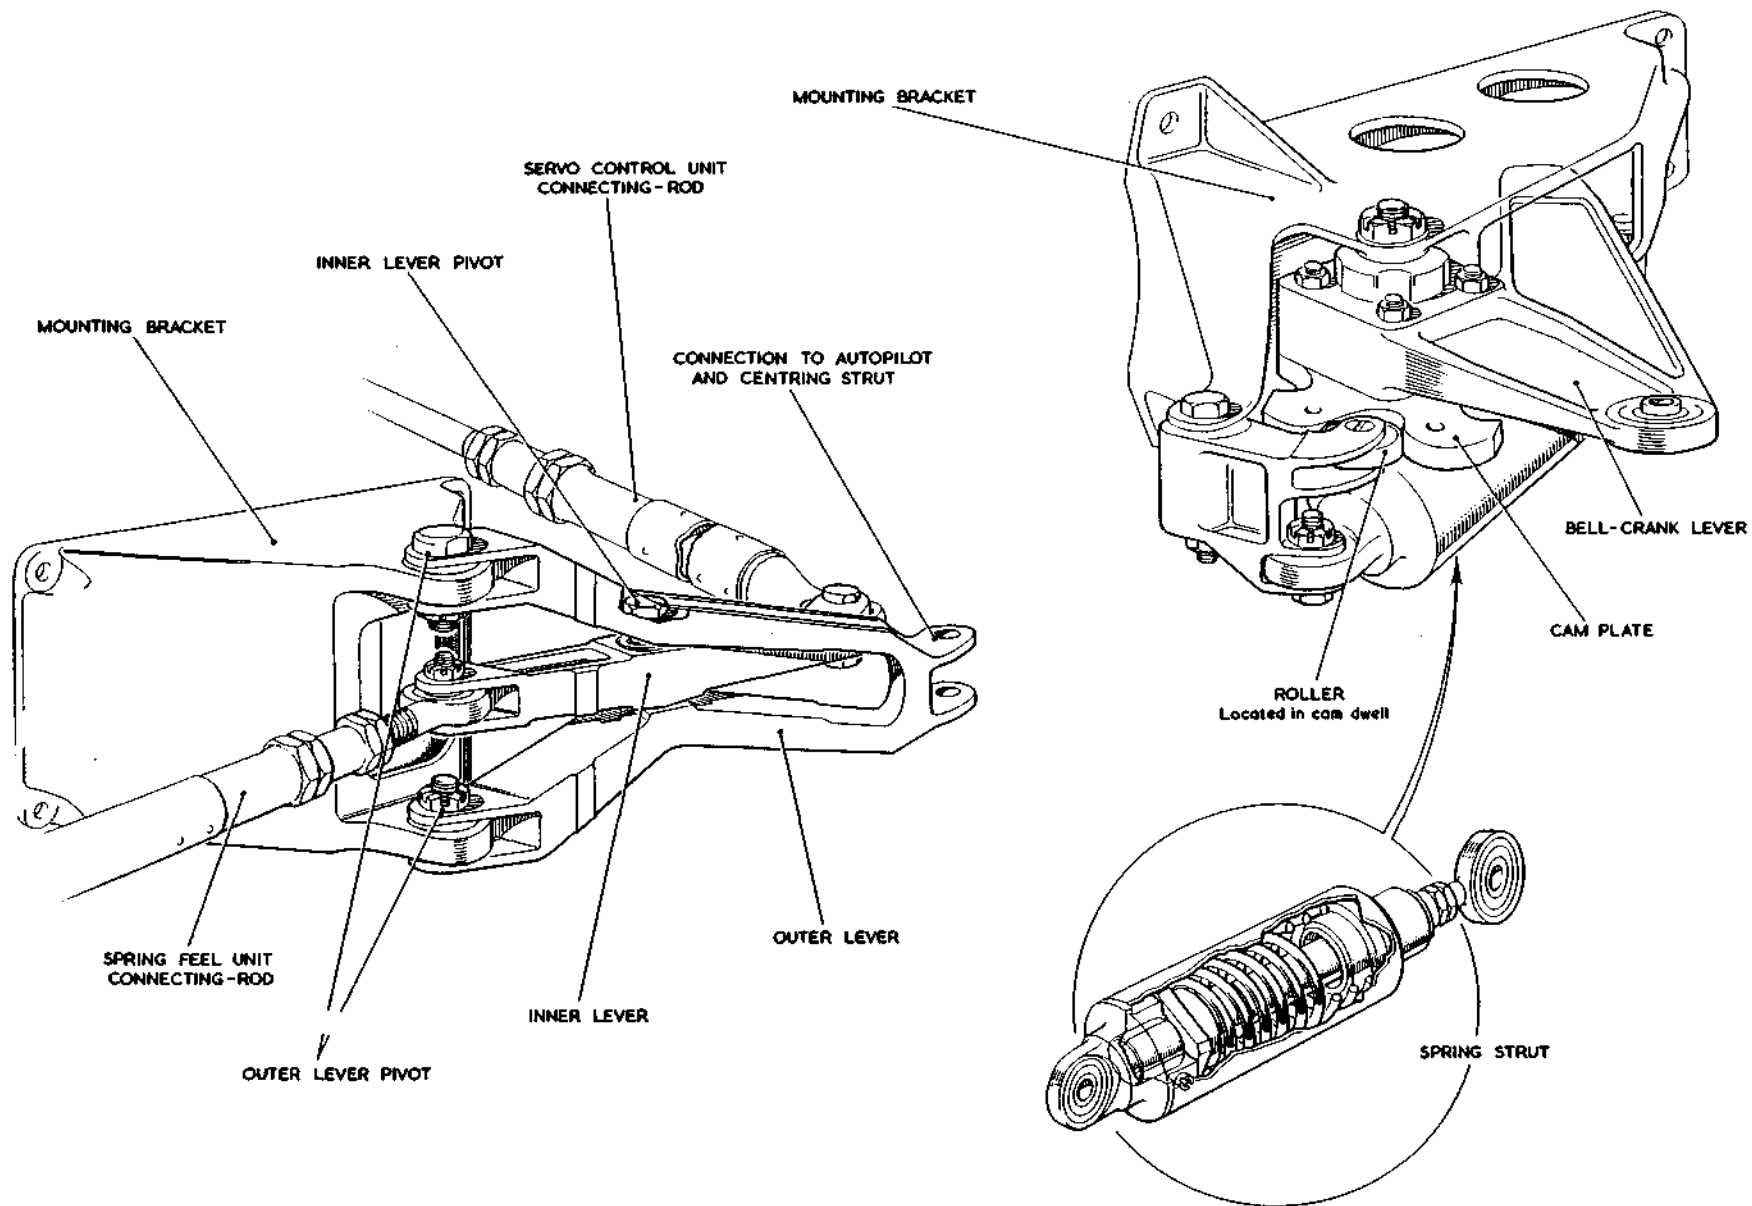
Aileron autopilot lever assembly and spring-feel unit
